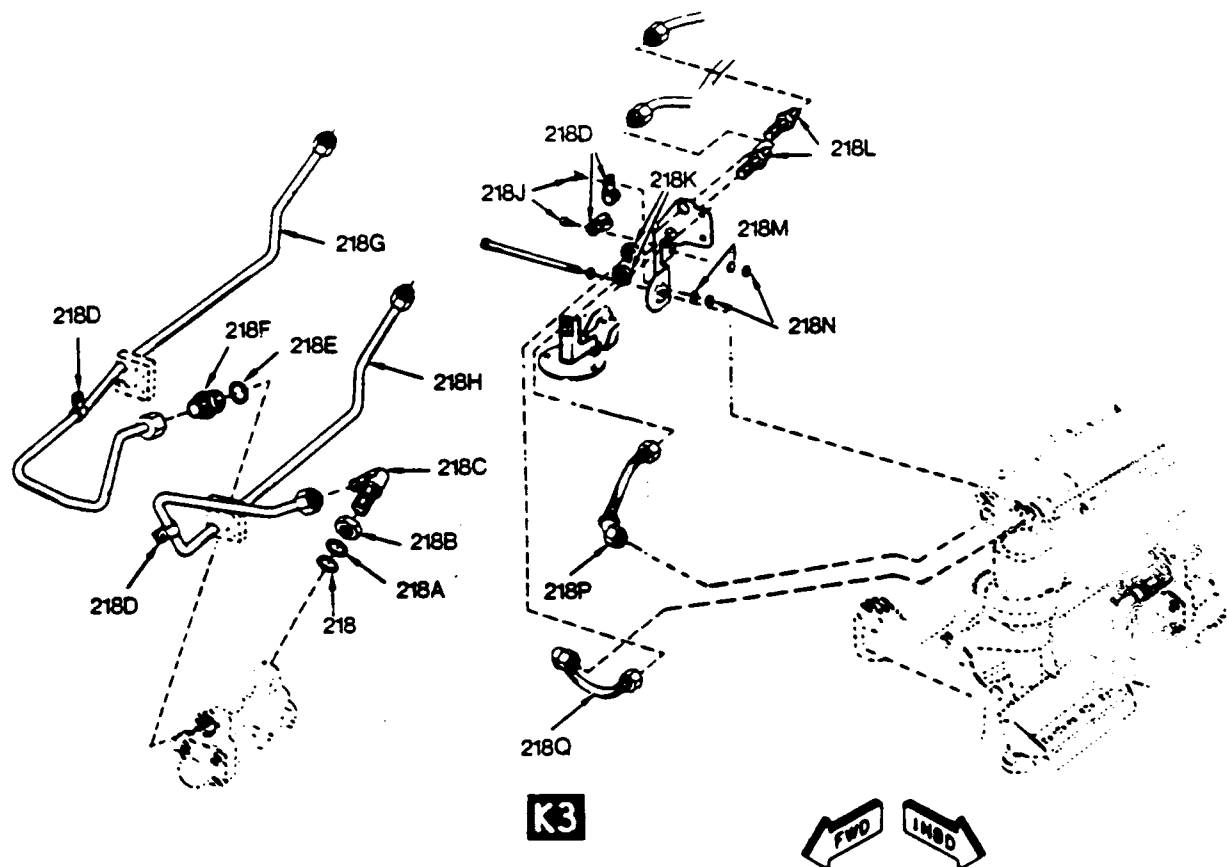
RH Aft Strut Assembly (Sheet 10 of 18)
